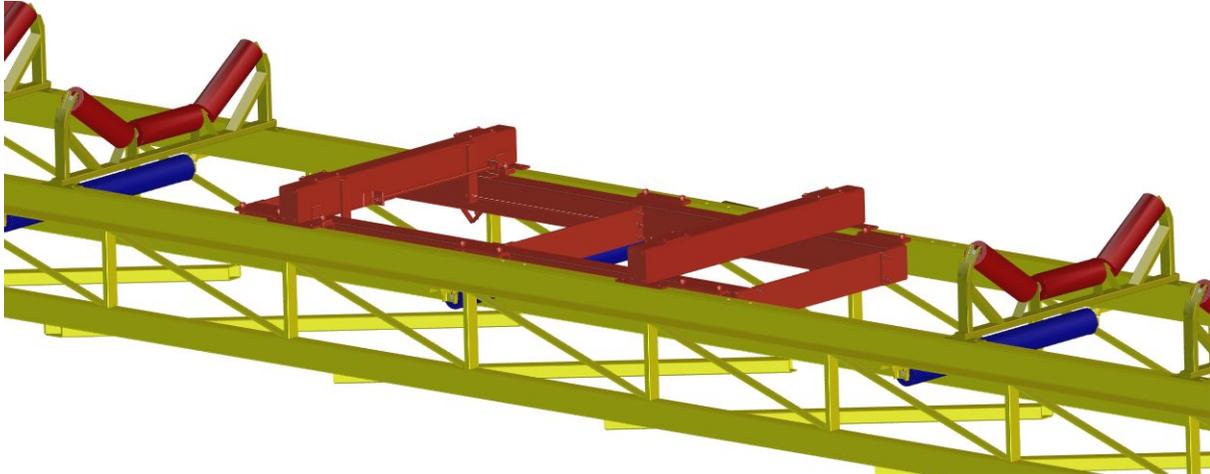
Add Weigh Frame Assembly to Conveyor
